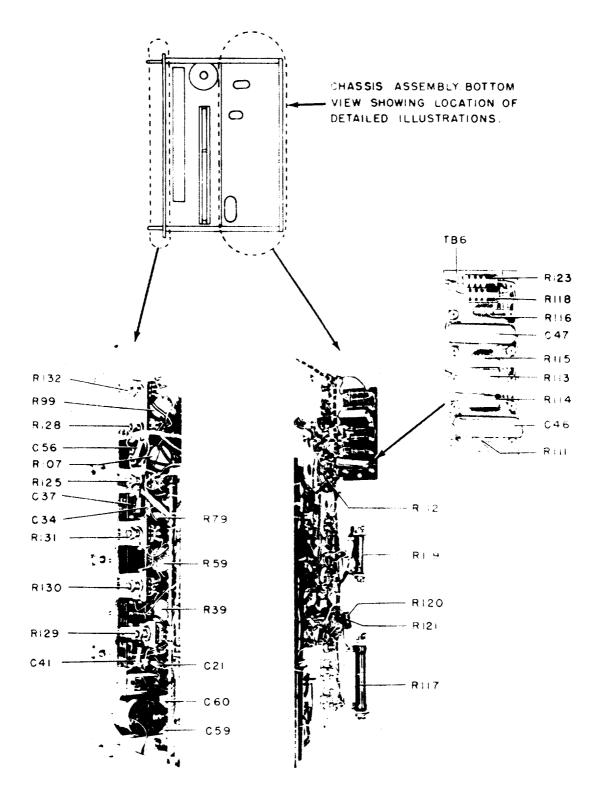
Front Panel, Inside Below Chassis, and Chassis, Inside Rear TS-592A/UPM-15
